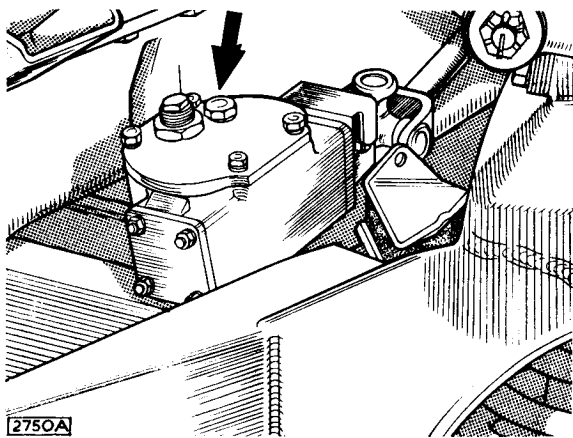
Steering Box Filler Plug (L.H.D.)
